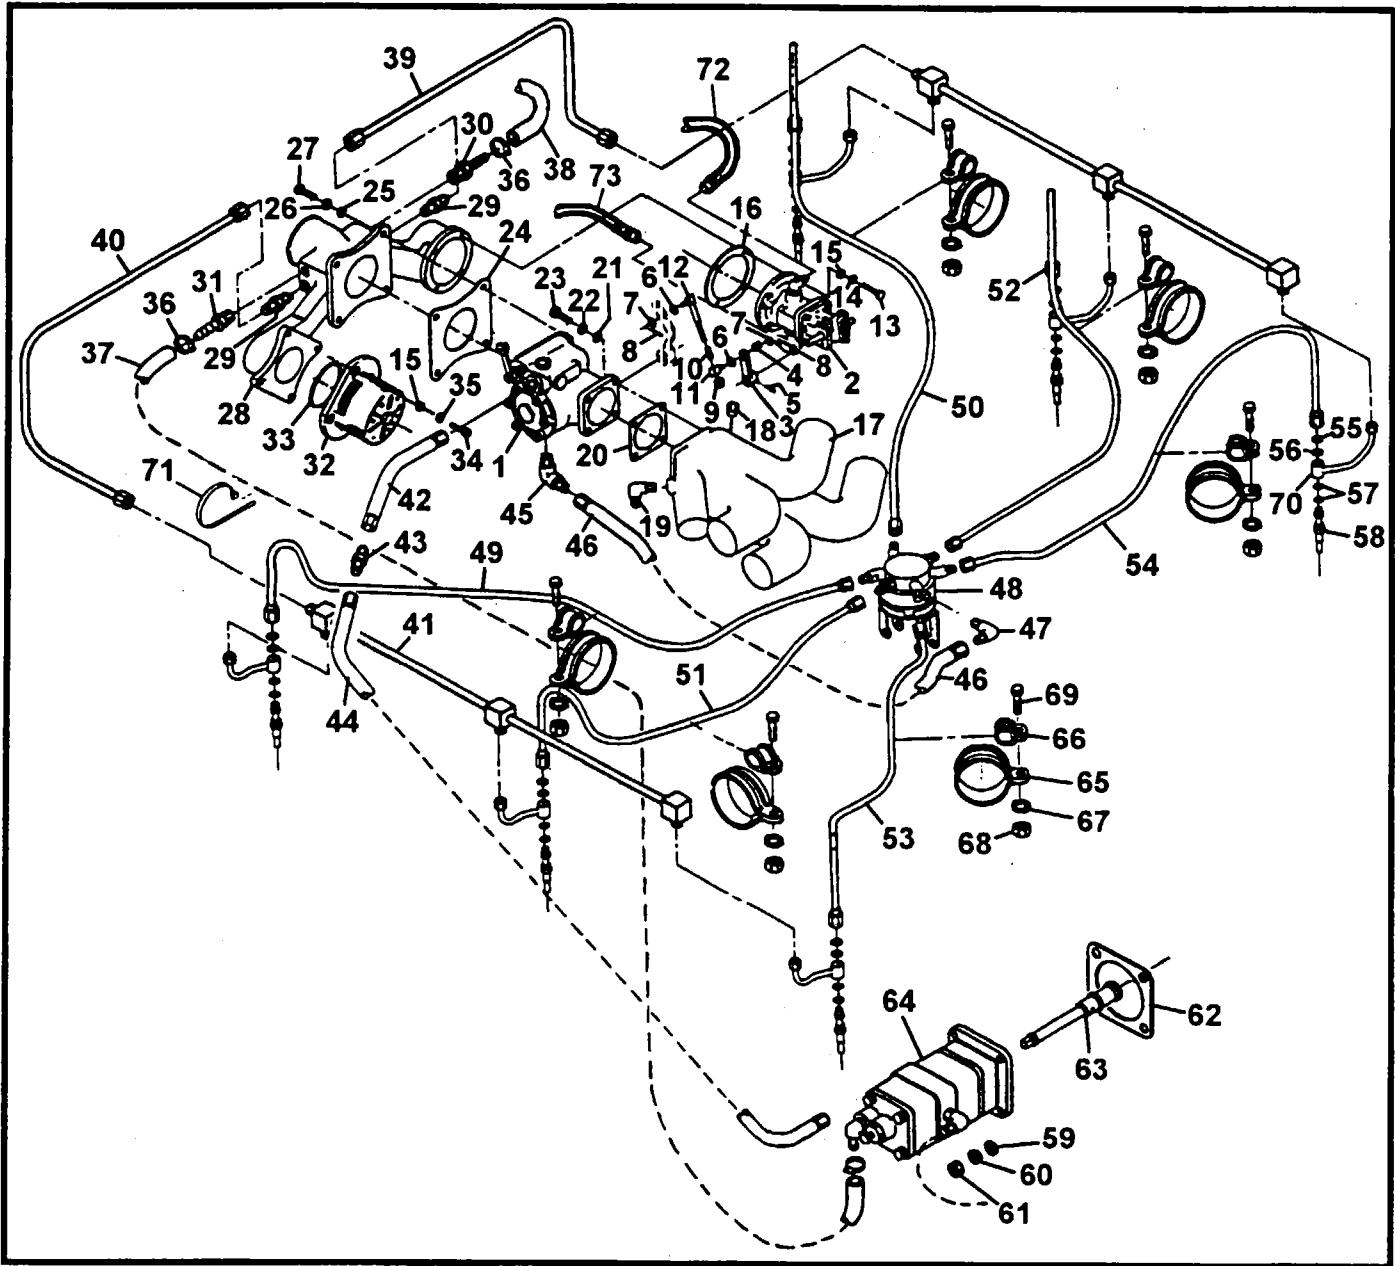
FUEL INJECTION ASSEMBLY
